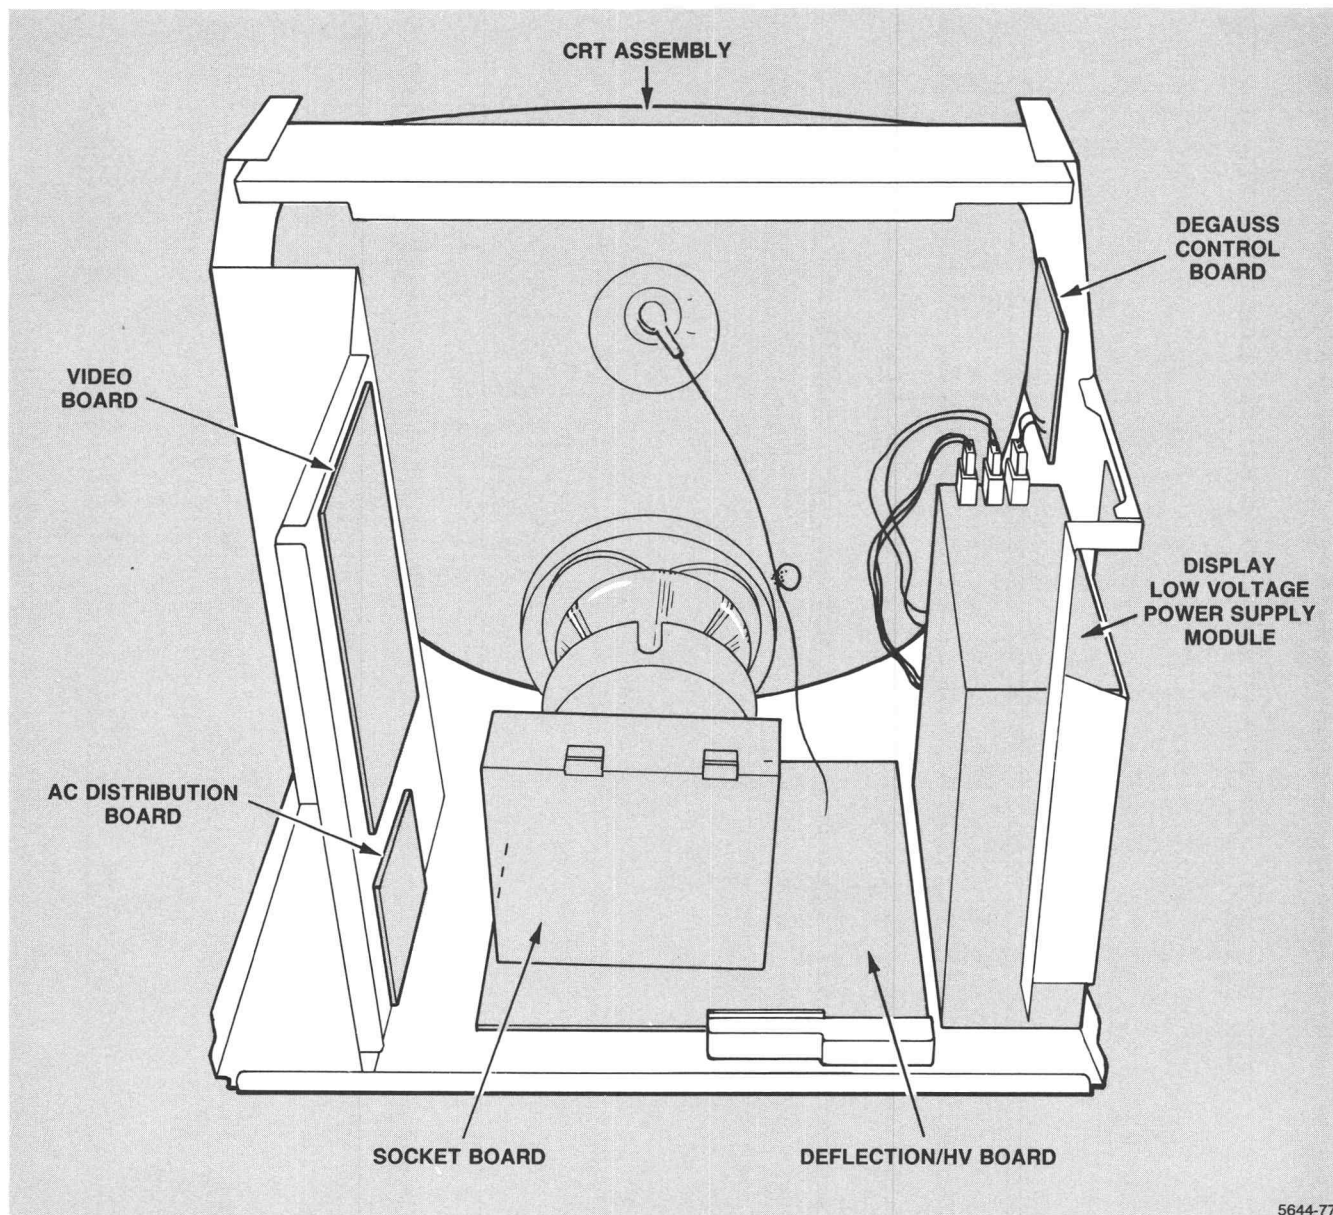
Circuit Boards and Assemblies in the 119-2387-00 Display Module.
